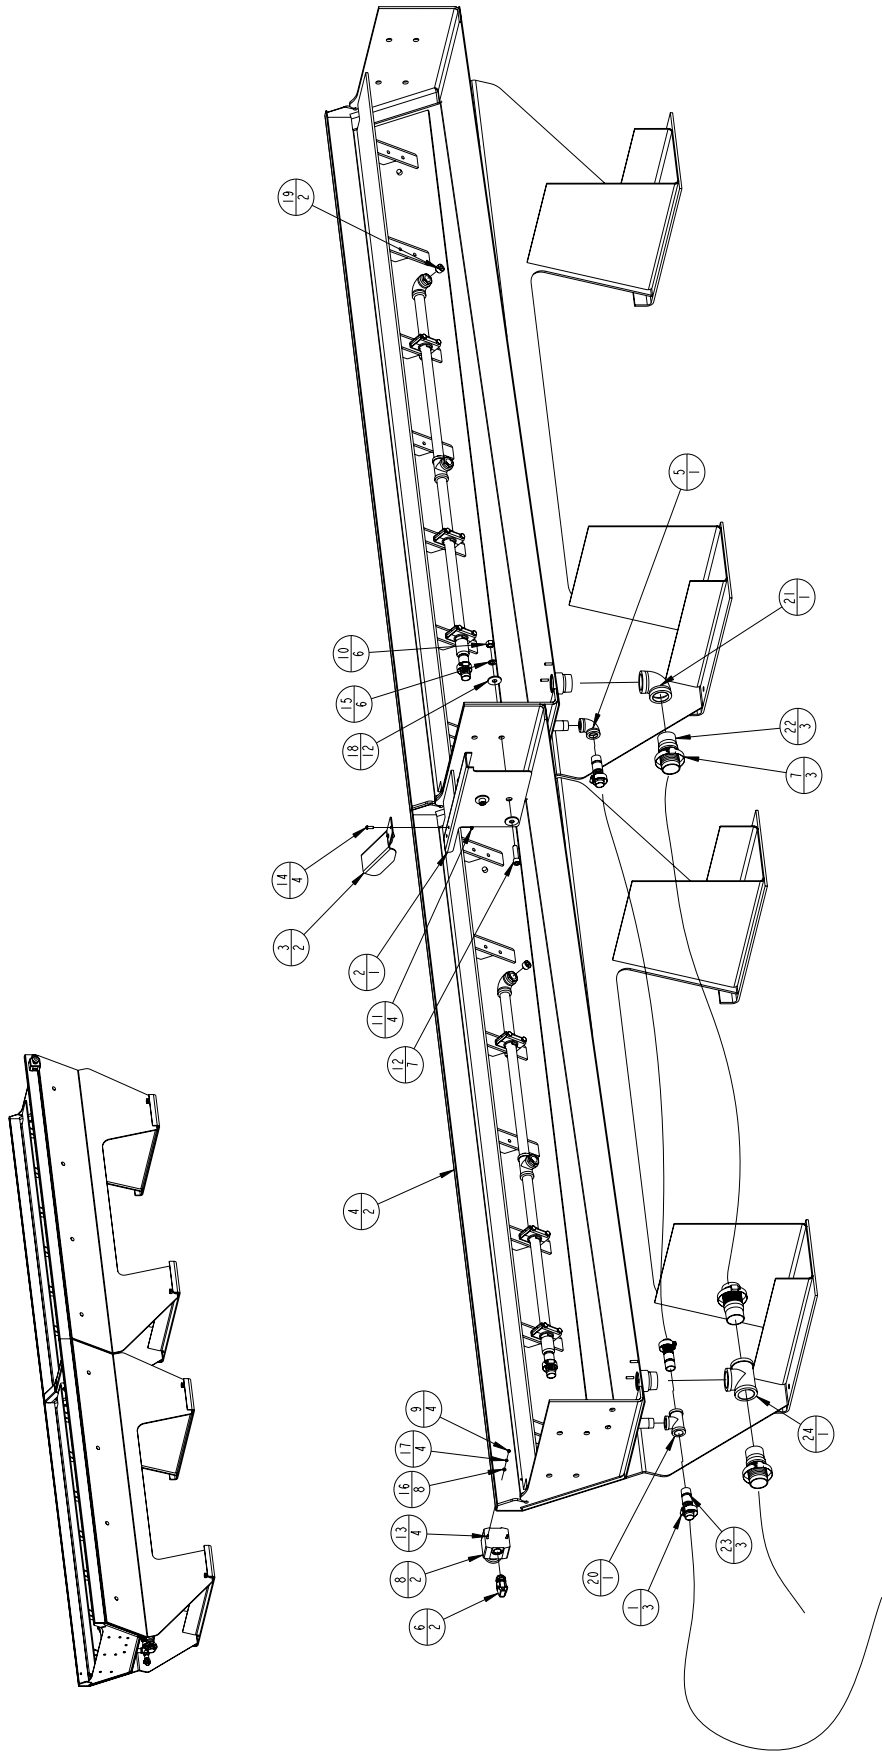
E — 4 METER CARRIAGE BASE ASSEMBLY (3 of 3)
